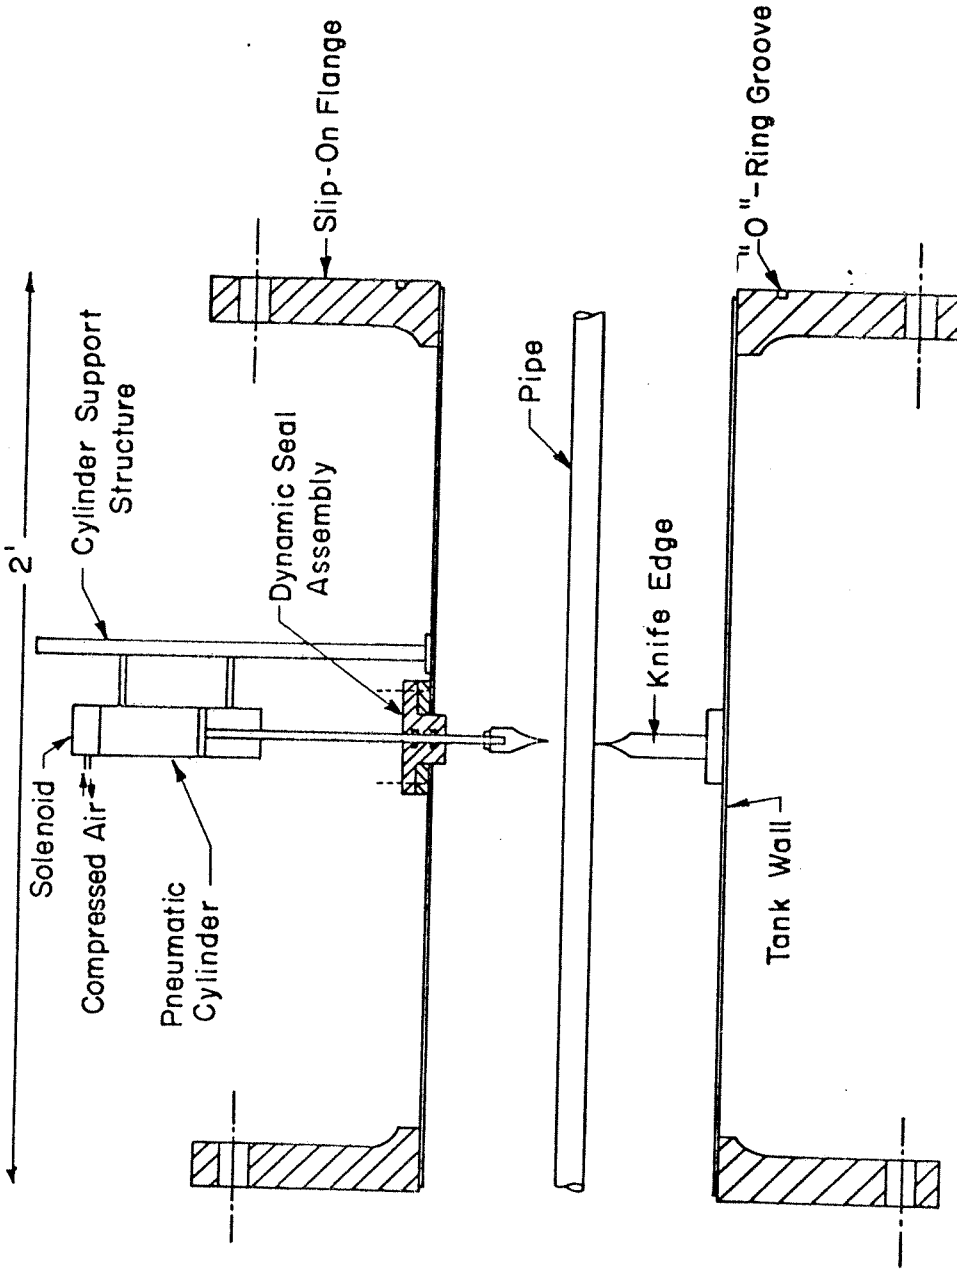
DETAILED DESIGN OF INITIATOR SECTION
